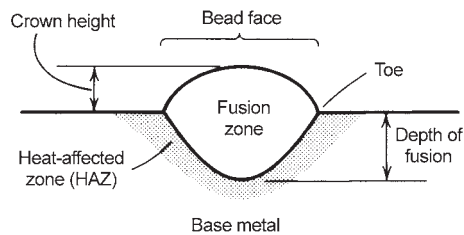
Weld bead geometry showing fusion zone, heat-affected zone, and base metal. Source: Ref 1.3
